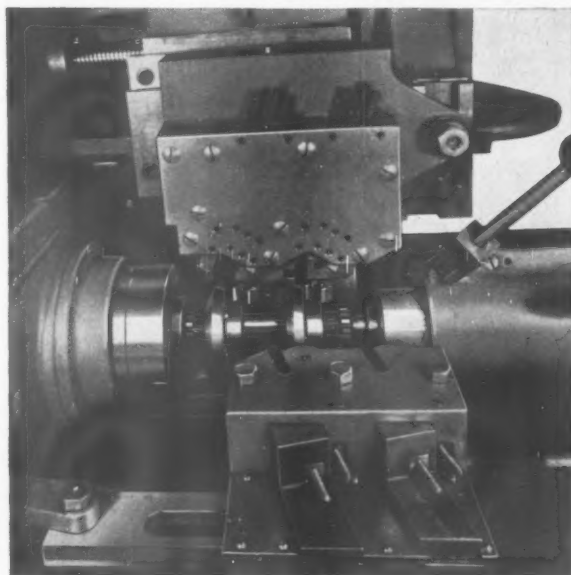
A total of 20 tools cut simultaneously on two gear blanks.
